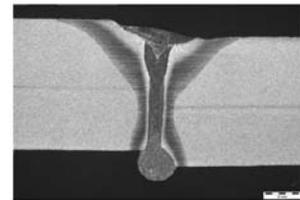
Cross-section through hybrid weld made over flush, close fitting V butt joint. 2 mm scale bar.
